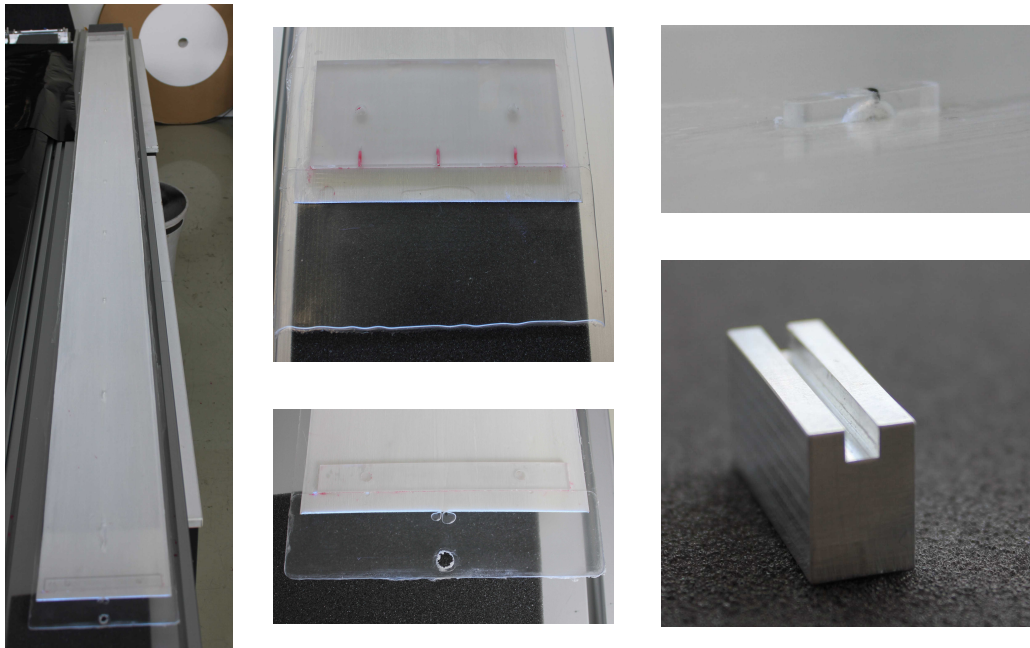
Step 11: Casted fibre mat after unforming from casting jig (left), lower endpiece half readout and mirror side (middle two), zoomed view of a casted alignment pin (upper right), precision gauge for quality assurance of alignment pin width (lower right).
